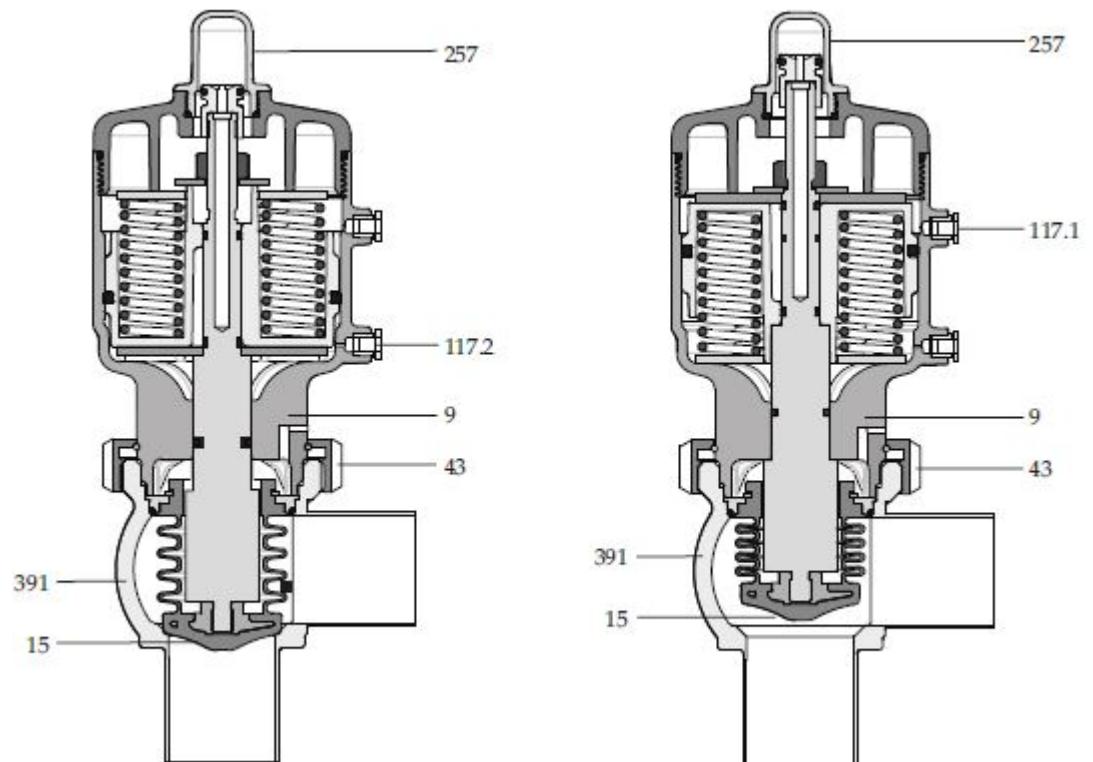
Design valve VESTA XL H_A - Spring-closing valve NC (left) and Spring-opening valve NO (right)
